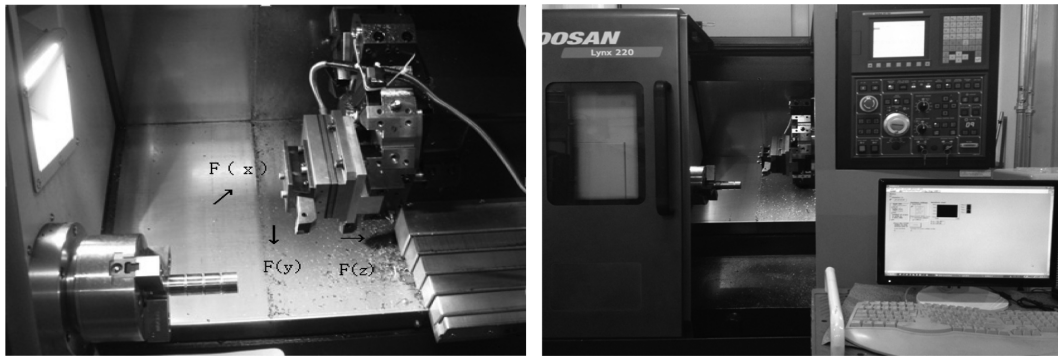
Operation set-up of cutting tool on the dynamometer.
